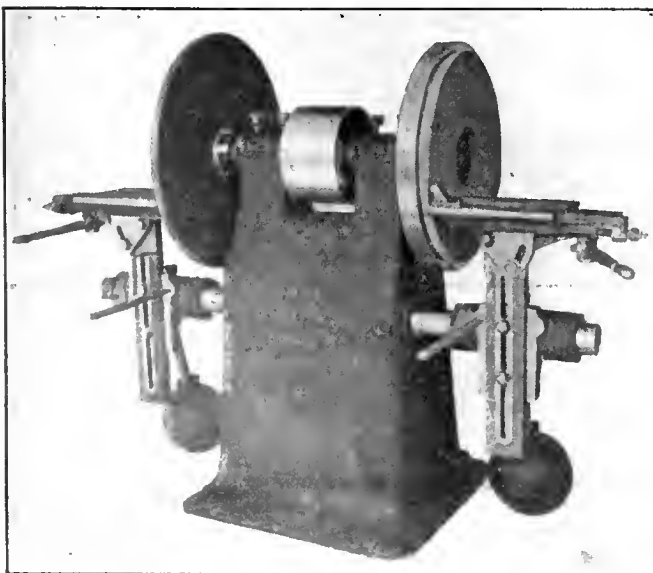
NO. 17 GRINDER WITH 24-INCH DIAMETER WHEEL.
